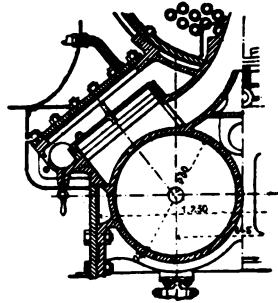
Inside Cylinder, showing disposition of Valve Chest.
